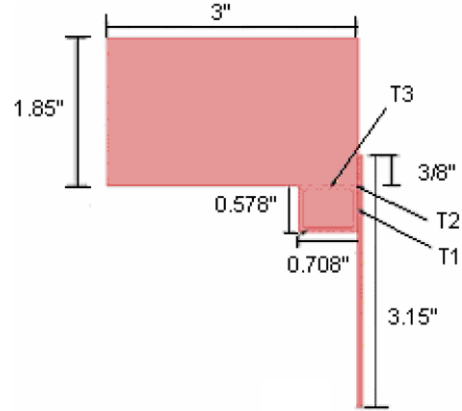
Welding of thin sheet to a block of steel.
